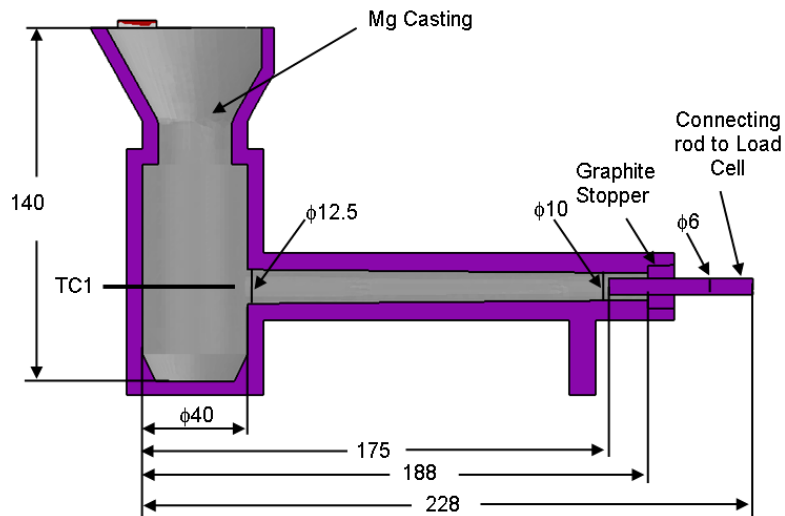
Geometry of casting mold. TC means the thermocouple.
